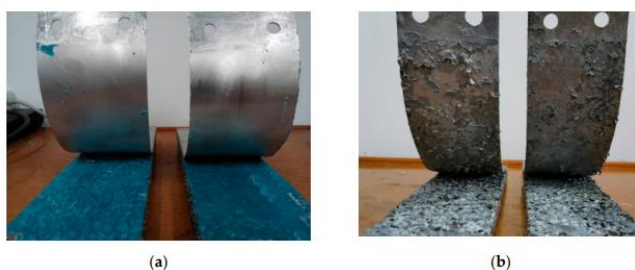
Fracture morphology of AFS samples. a) Adhesive joining b) metallurgical joining [27]
